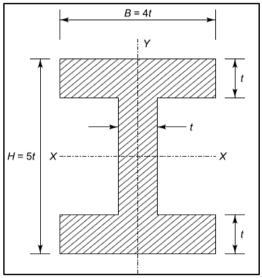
Typical cross-sectional view of Connecting Rod. [1]
